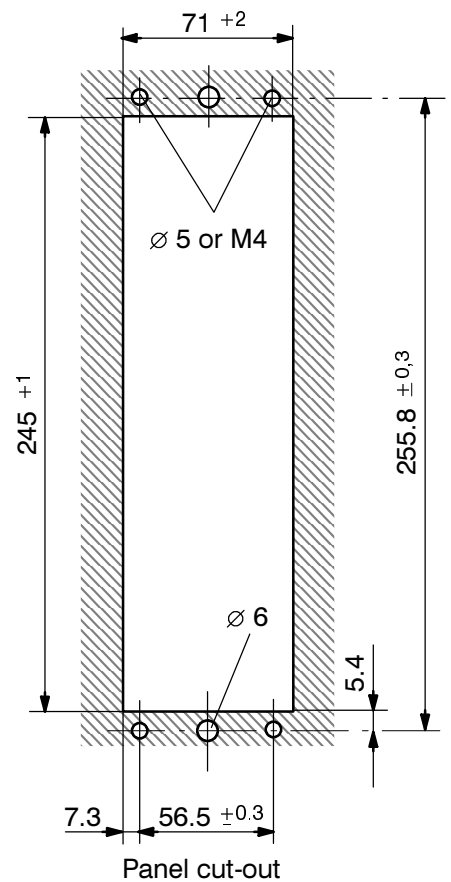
Dimensions for housing 7XP20 for panel flush mounting or cubicle installation
